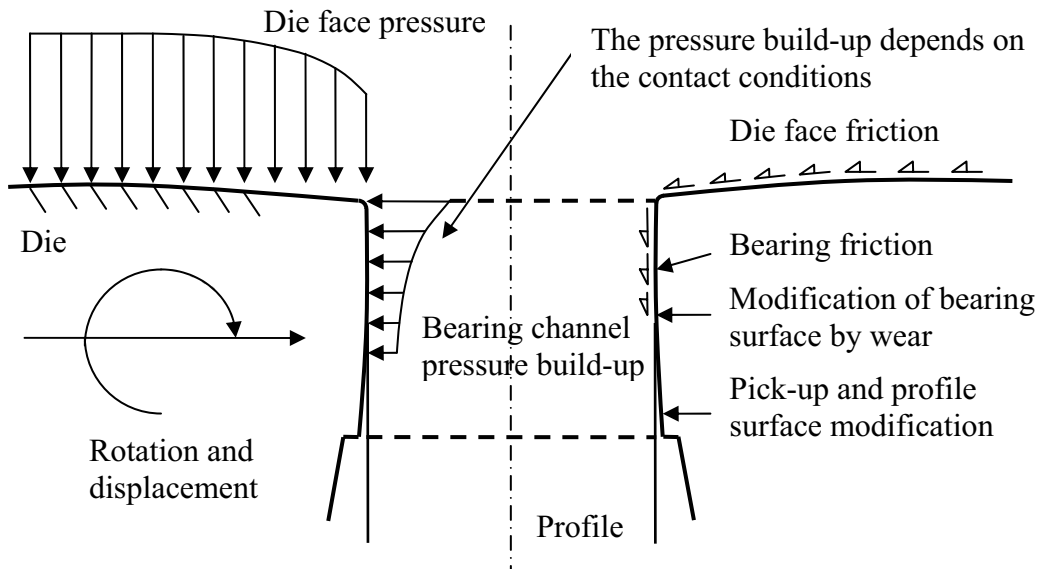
A model of flow and friction close to the outlet of the extrusion die. The bearing channel is nominally slightly choked (a), but deformation of the die and wear may cause it to become parallel or even in release (b).
